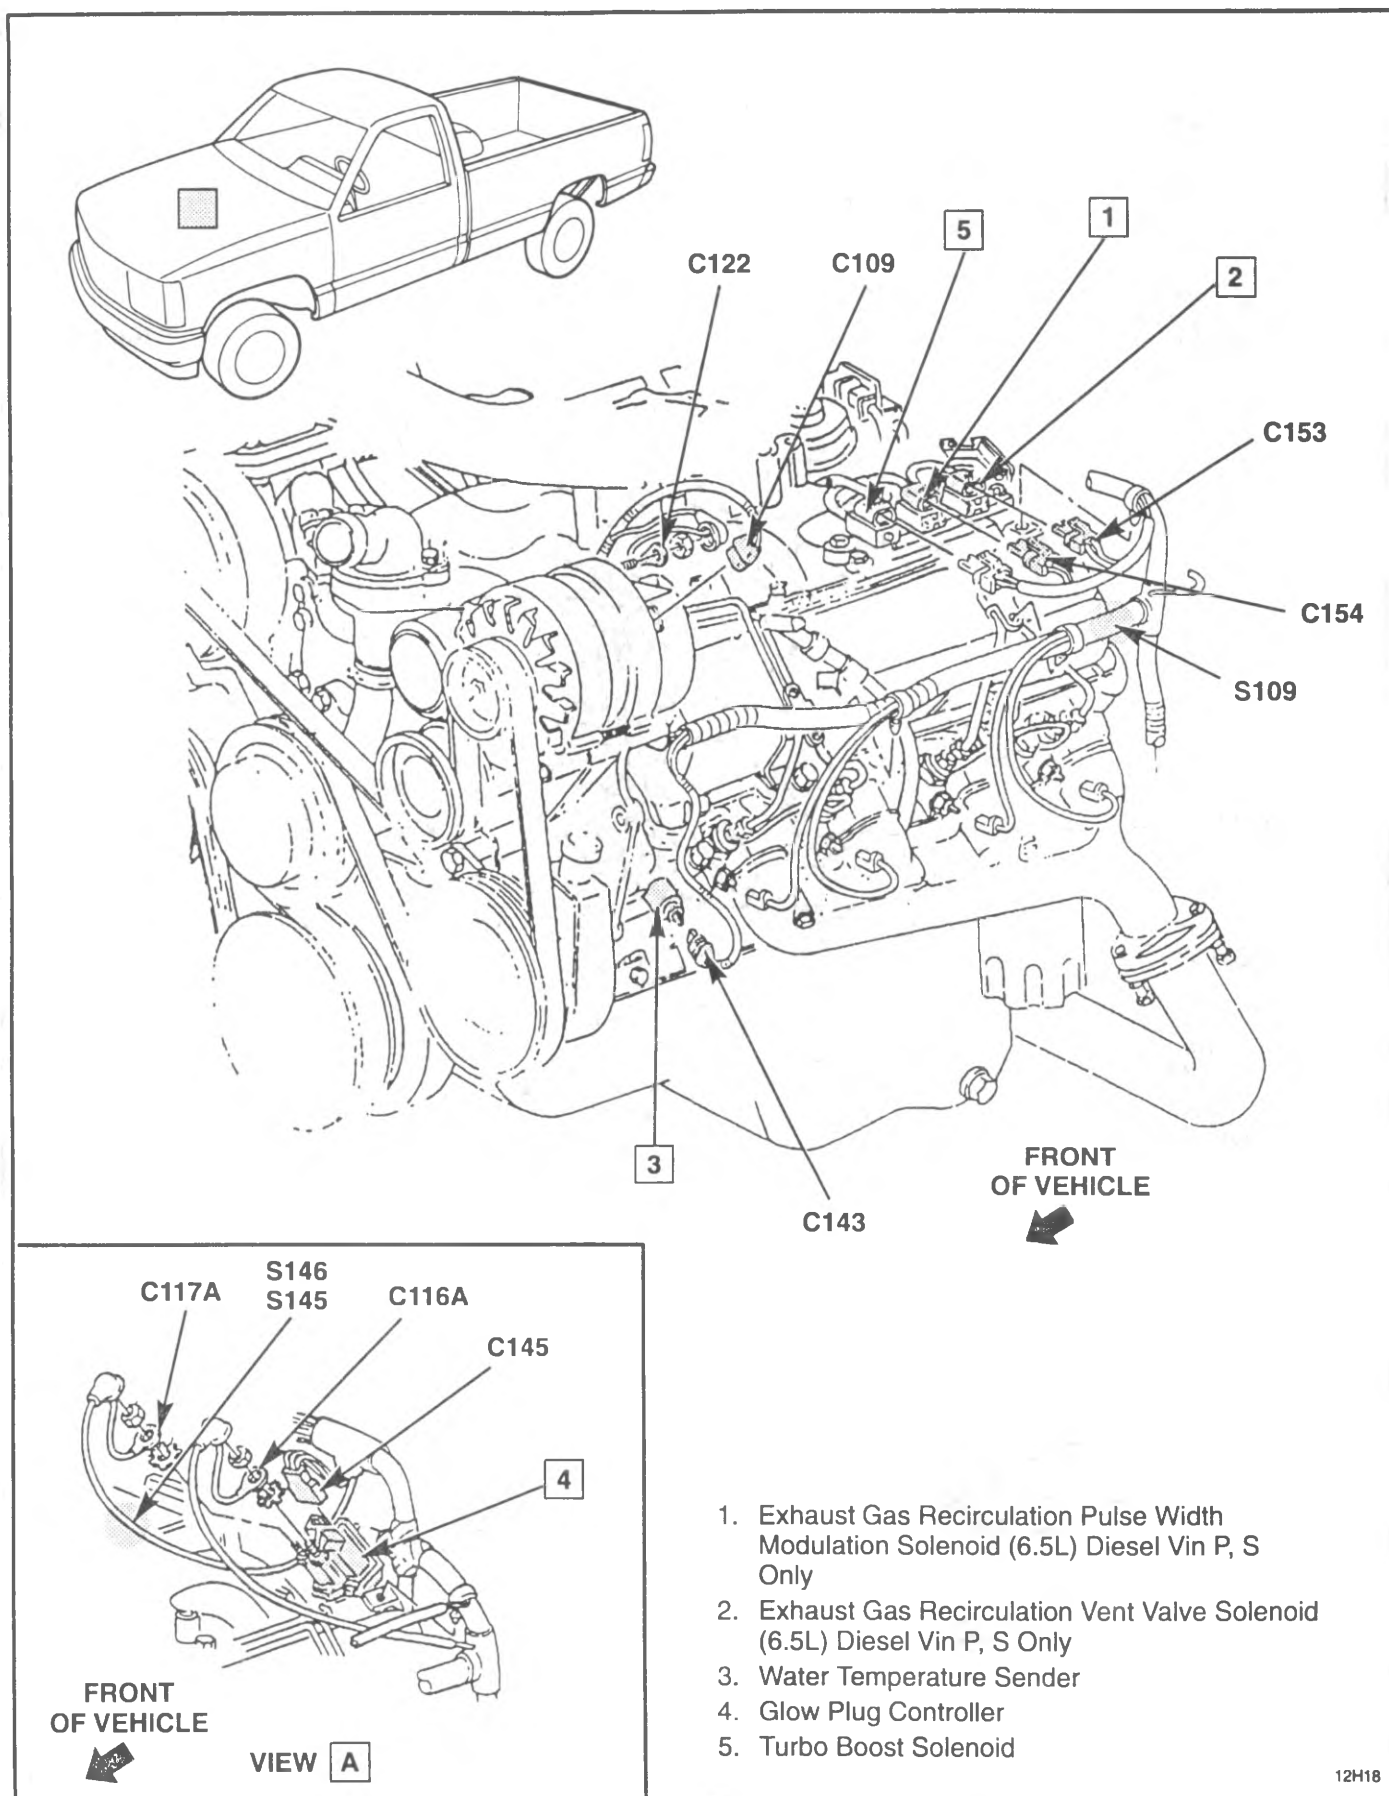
6.5L Diesel Engine Wiring, LH Side
